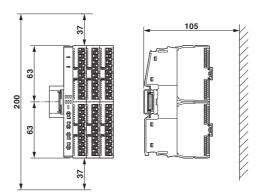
Mounting distances: AXL F BP SE ... with inserted Axioline Smart Elements
